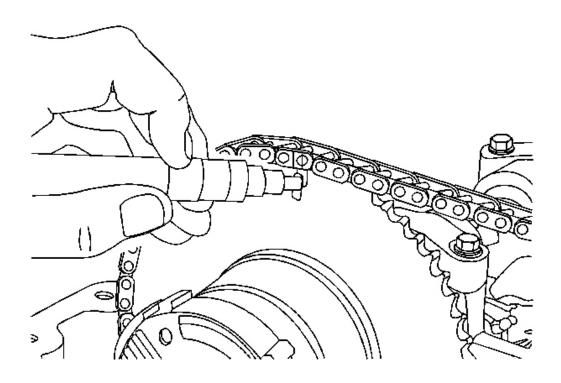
Cleaning Timing Chain Courtesy of GENERAL MOTORS CORP.
